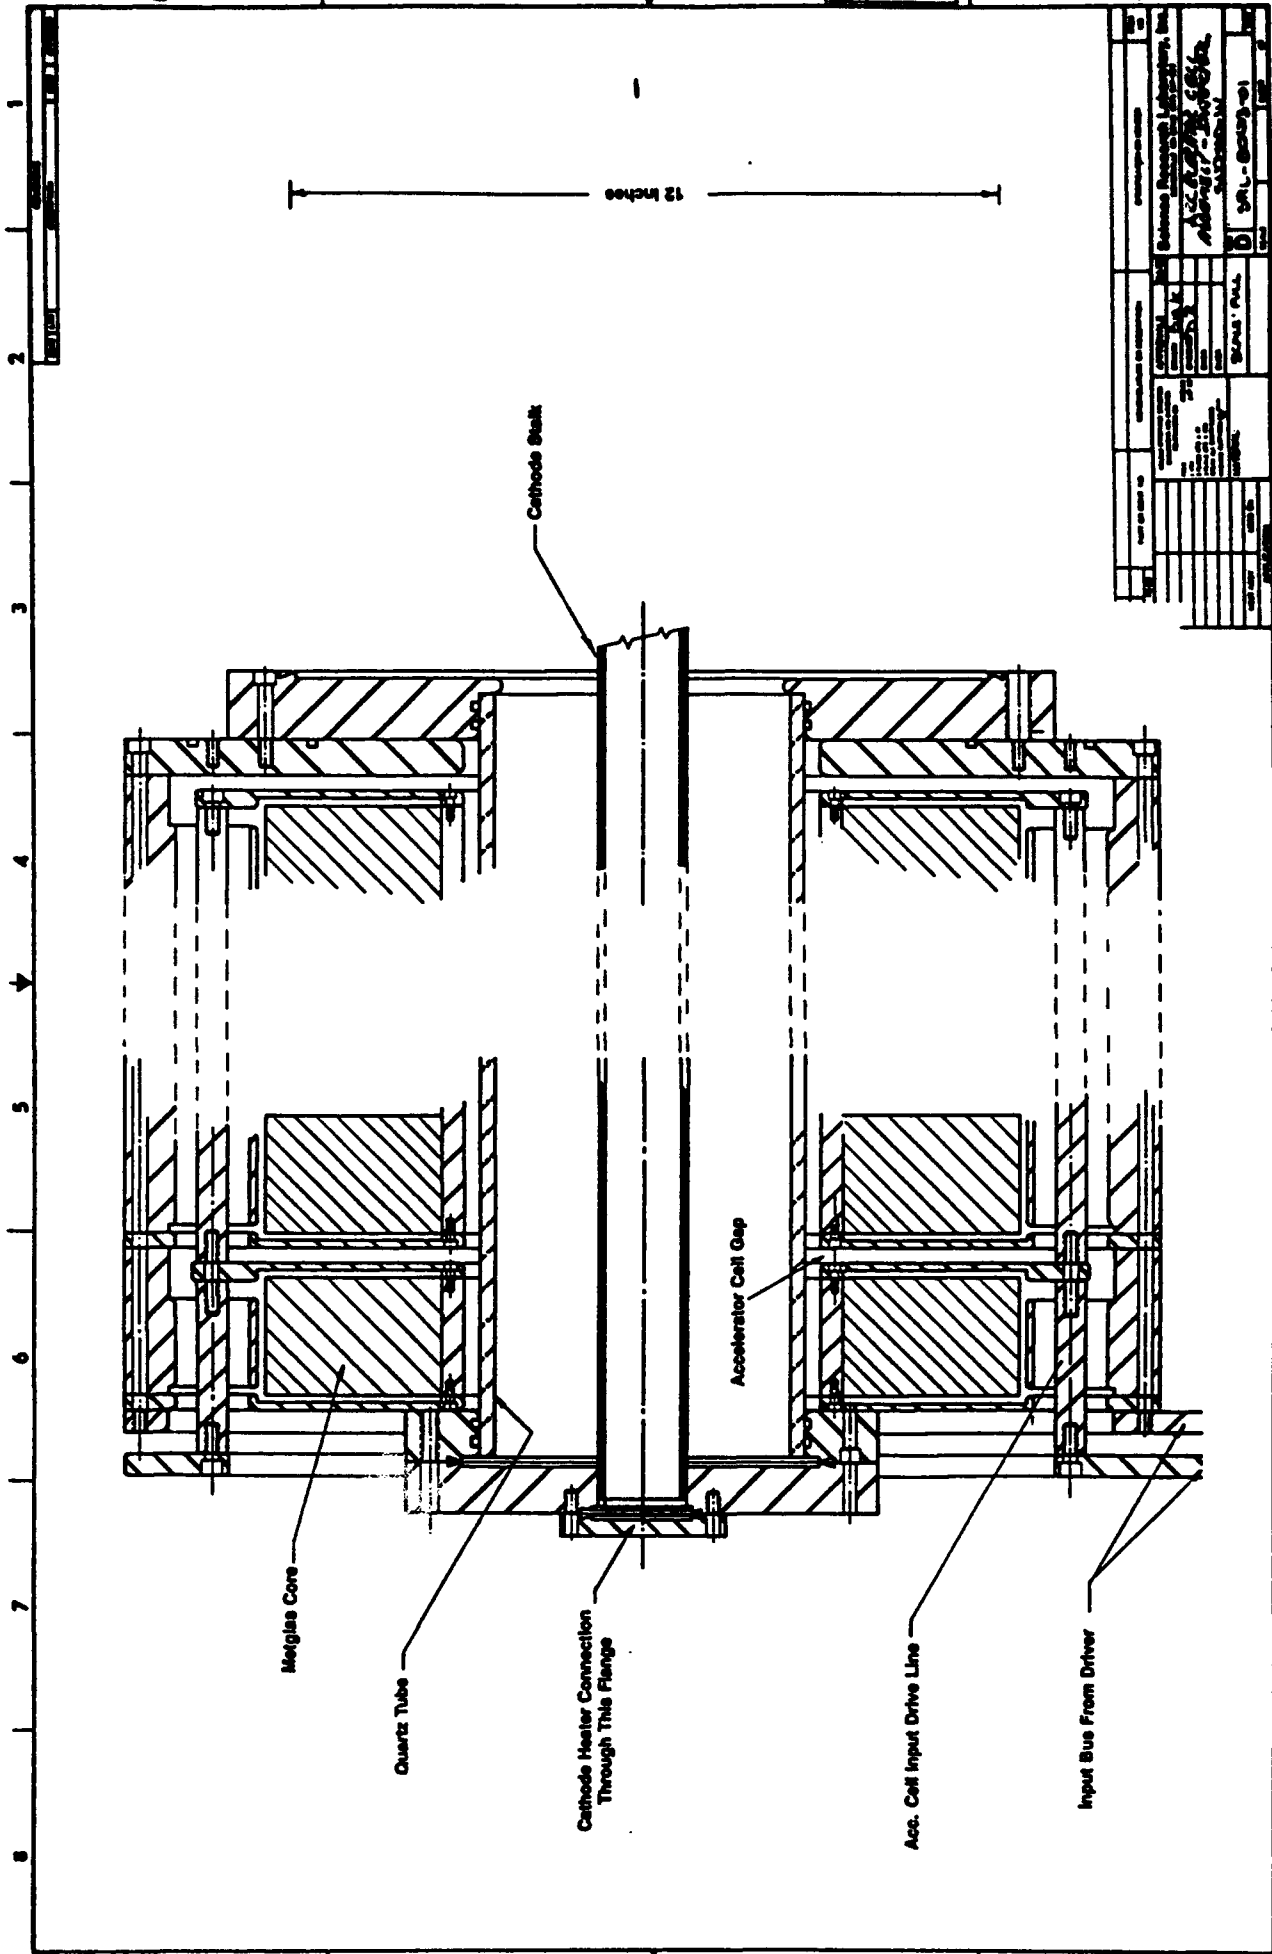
Drawing of SNOMAD-IV 0.5 MeV injector accelerator cell assembly.
